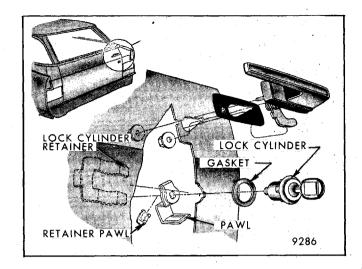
Tailgate Lock Cylinder and Outside Handle
